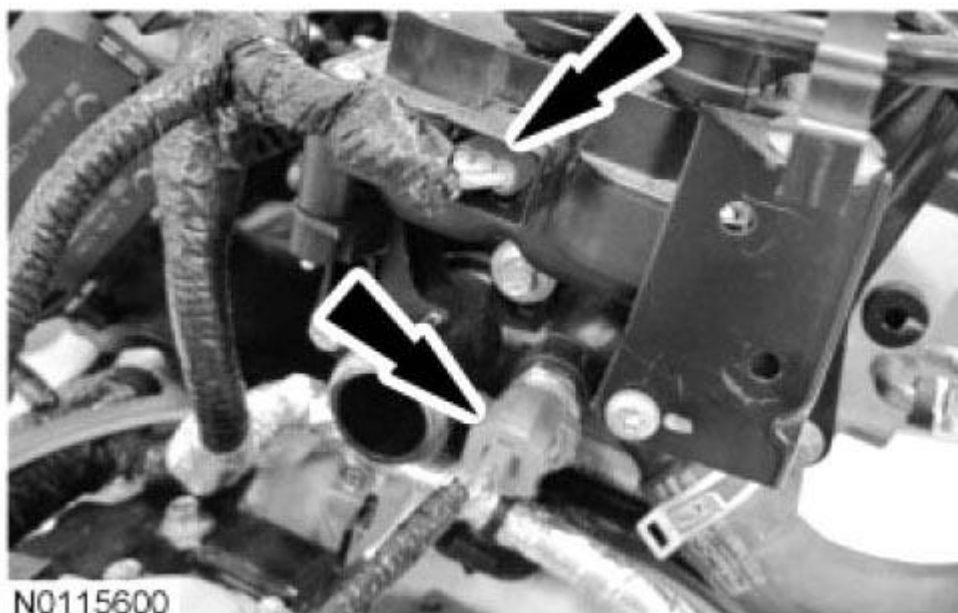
Locating Ignition Coil And Engine Coolant Temperature (ECT) Sensor Electrical Connectors
